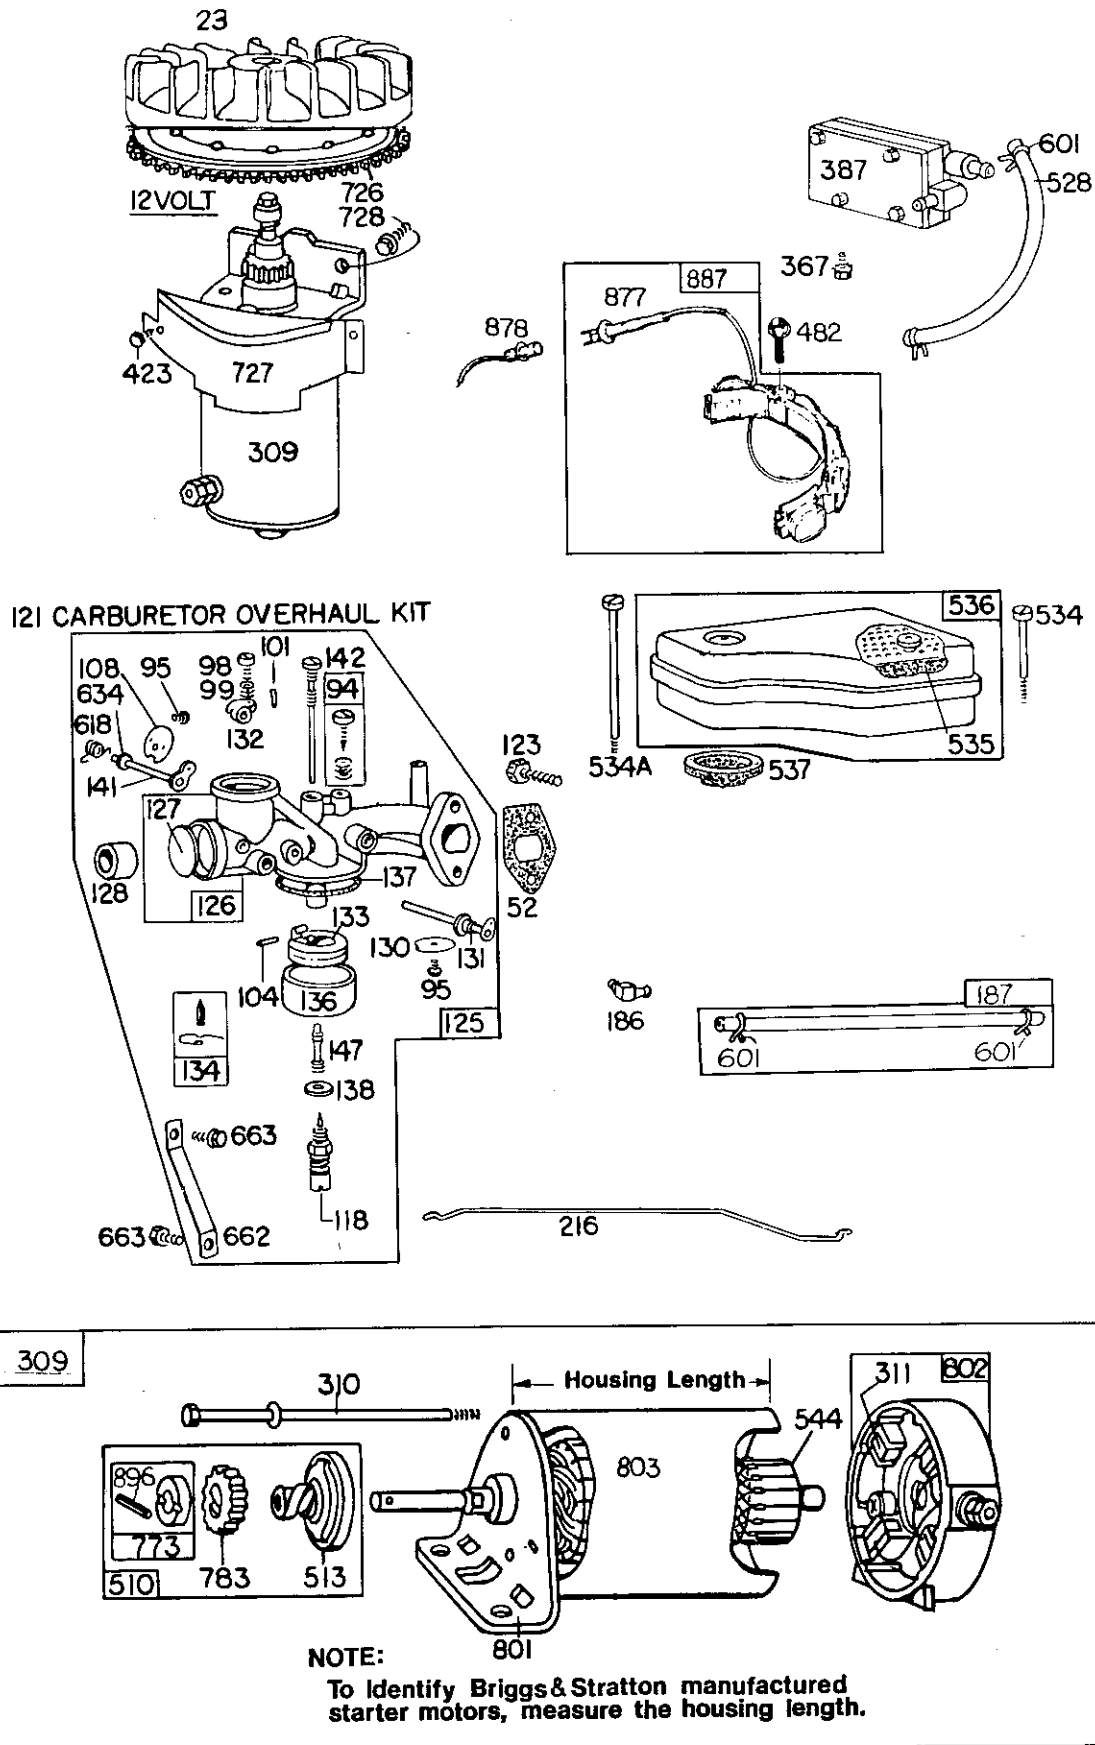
A. MODEL 814 (BRIGG'S & STRATTON ENGINE ASSEMBLY 191707-5651-01)
